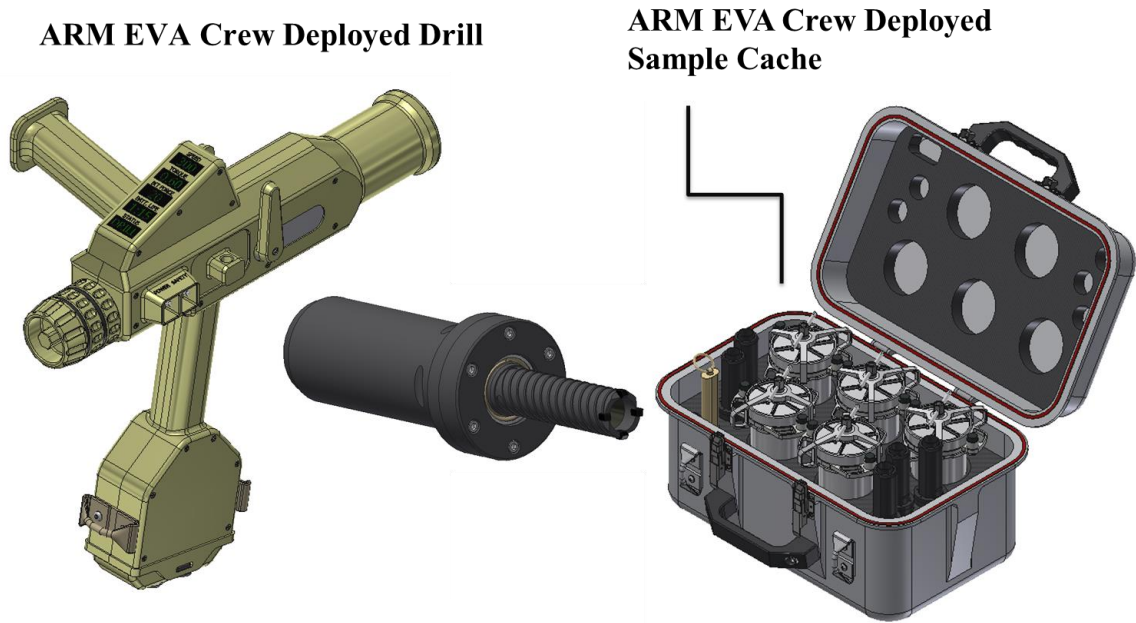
Figure P. Proposed EVA Drill Tool (courtesy of HoneyBee Inc)
